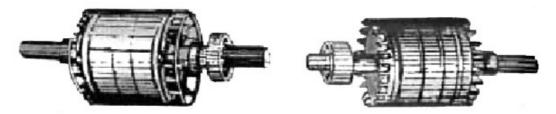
Squirrel-cage rotor with copper bars and alloy brazed end-rings
